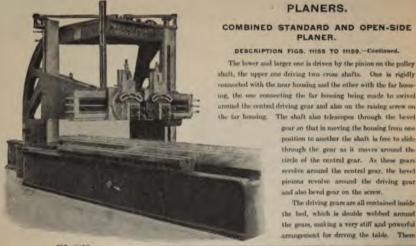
REAR VIEW AS OPEN-SIDE PLANER.
